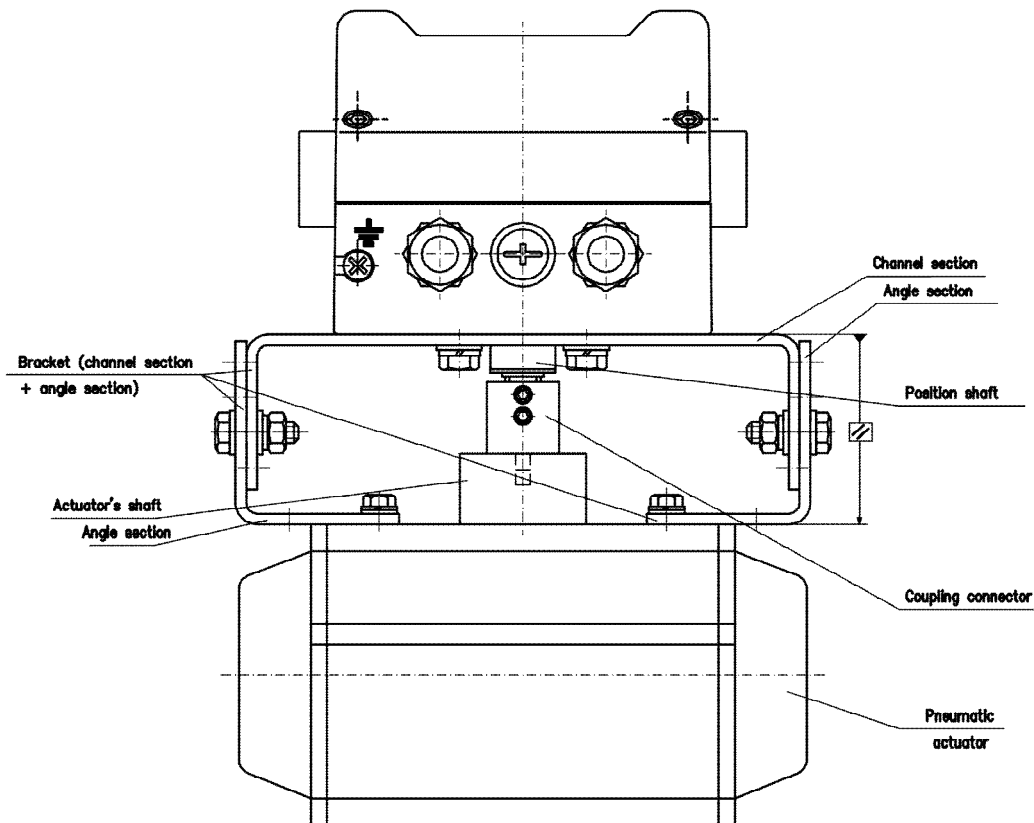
Positioner type APIS-1X0-... with mounting kit APIS-A0002-SS(SO) (positioner mounted on actuator type P1 or R1 Polna S.A. Ltd company)
